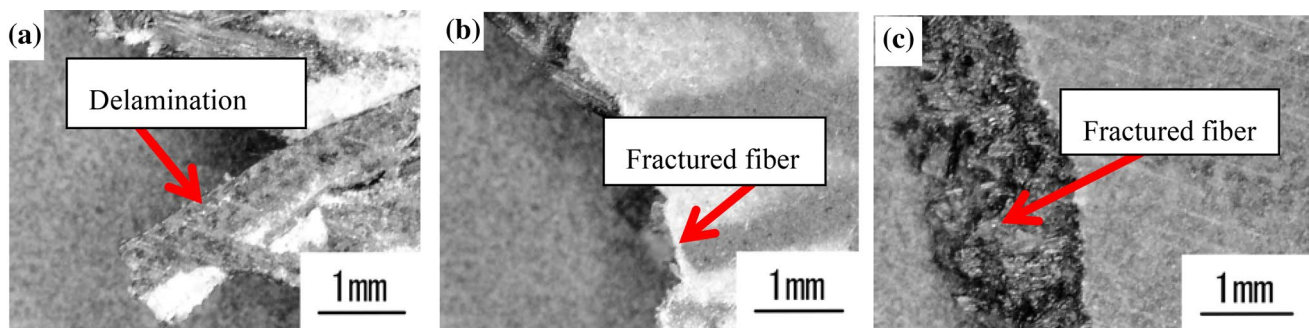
Fracture surface of specimens molded at 160, 180, and 200 °C with a fiber content of 50%
